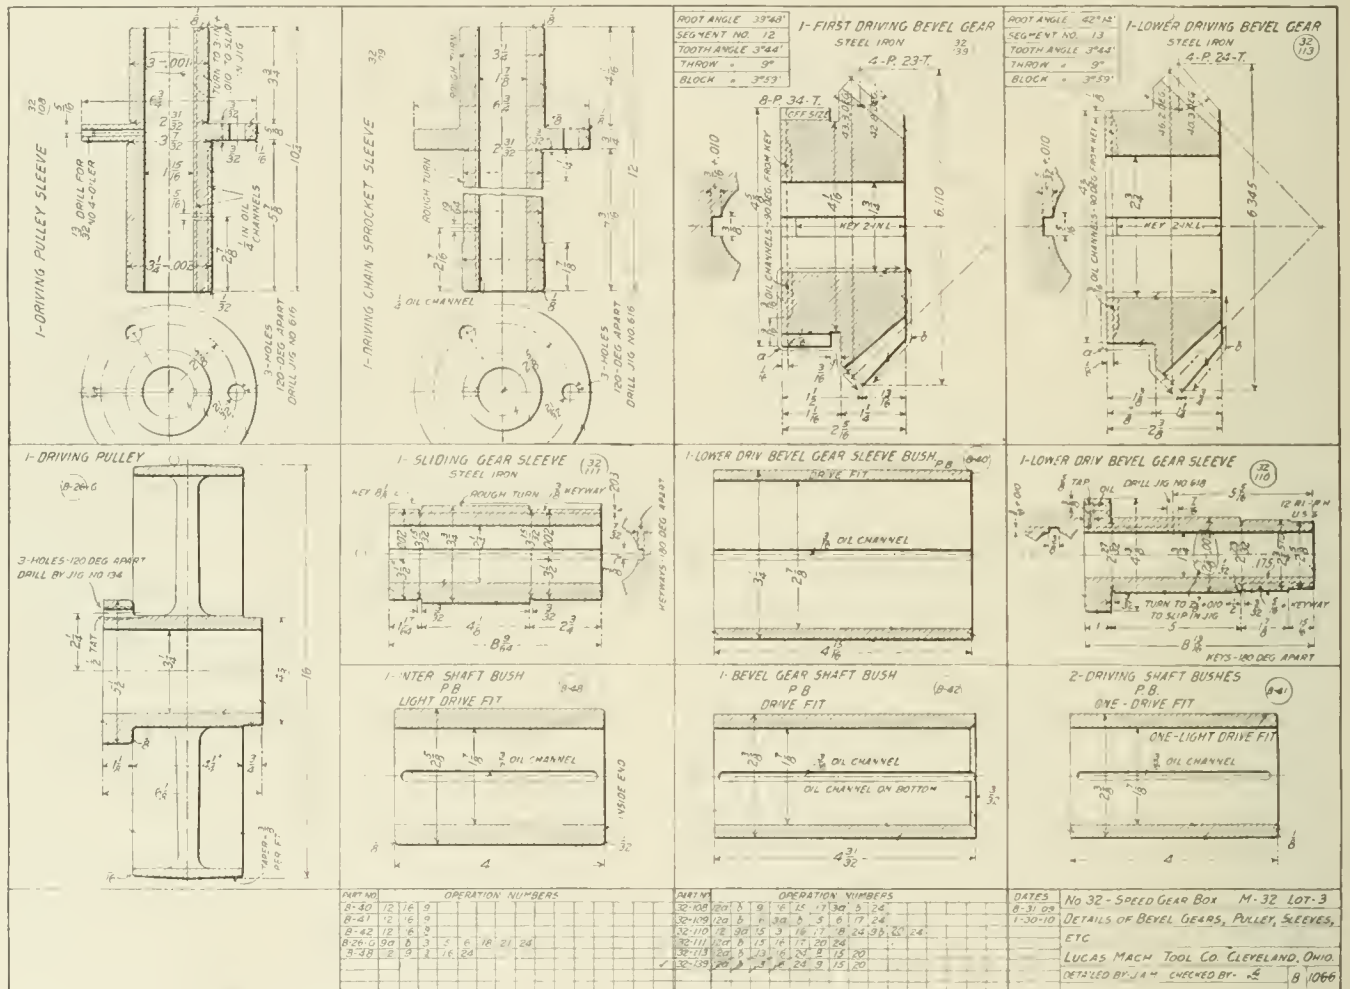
Detail Drawing, Lucas Machine Tool Co., showing Operation Numbers and Record of Progress
